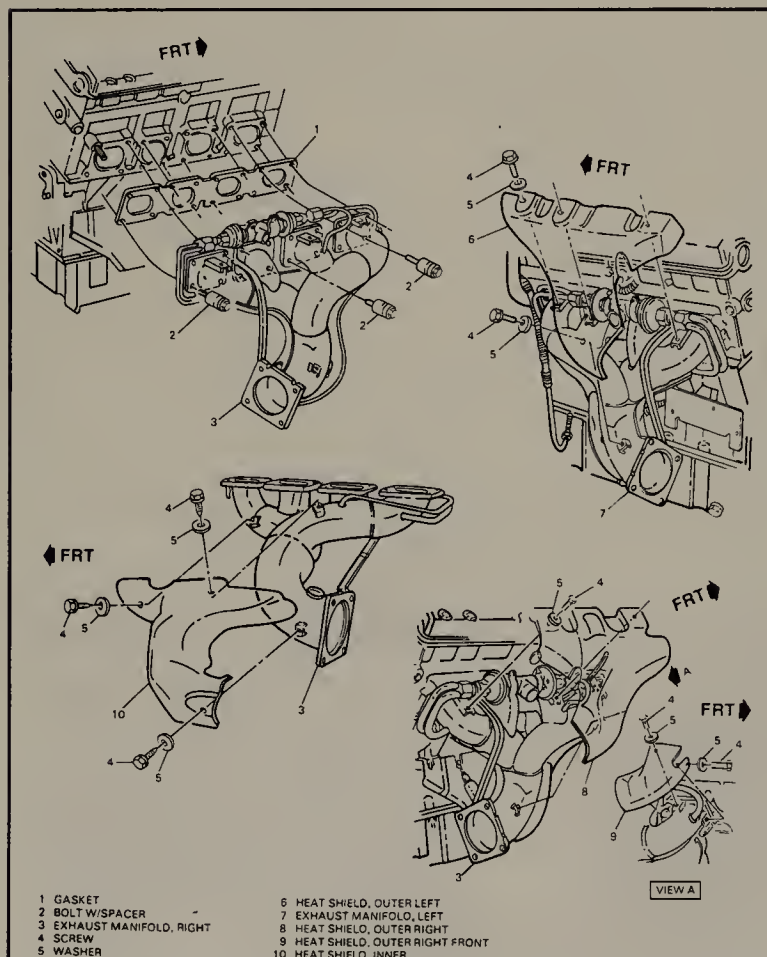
View of the exhaust manifolds used on late 1992 and 1993–95 vehicles—5.7L (VIN J) engines
